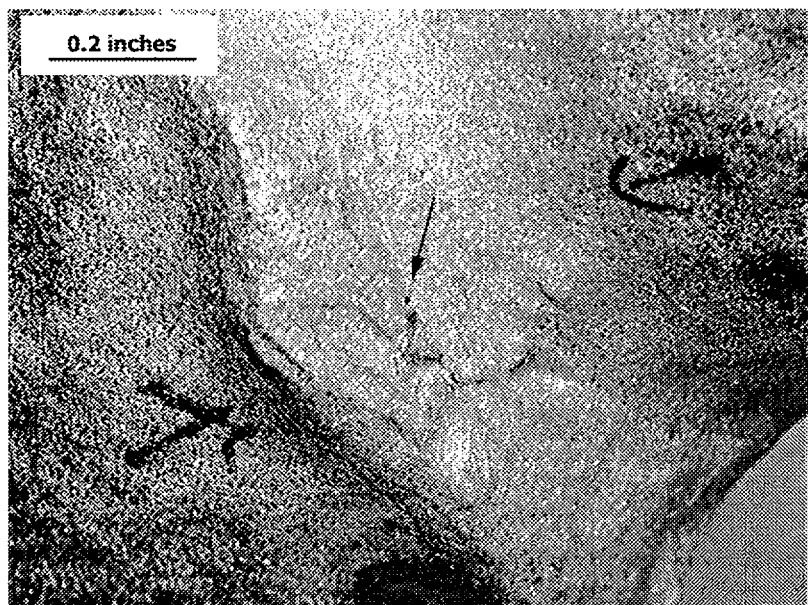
Photograph showing porosity and linear defect on outside surface, at pipe-side toe in another region of socket weld.
